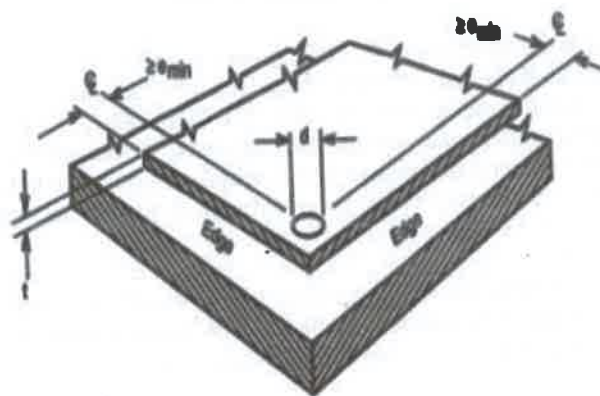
Edge Distance for Arc Spot Welds – Single Sheet
